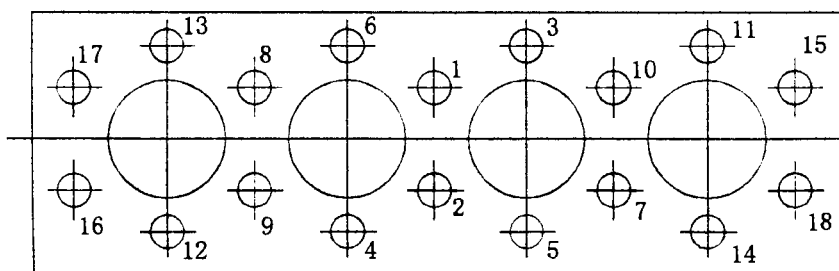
Sequence of tightening the bolts of the cylinder head
